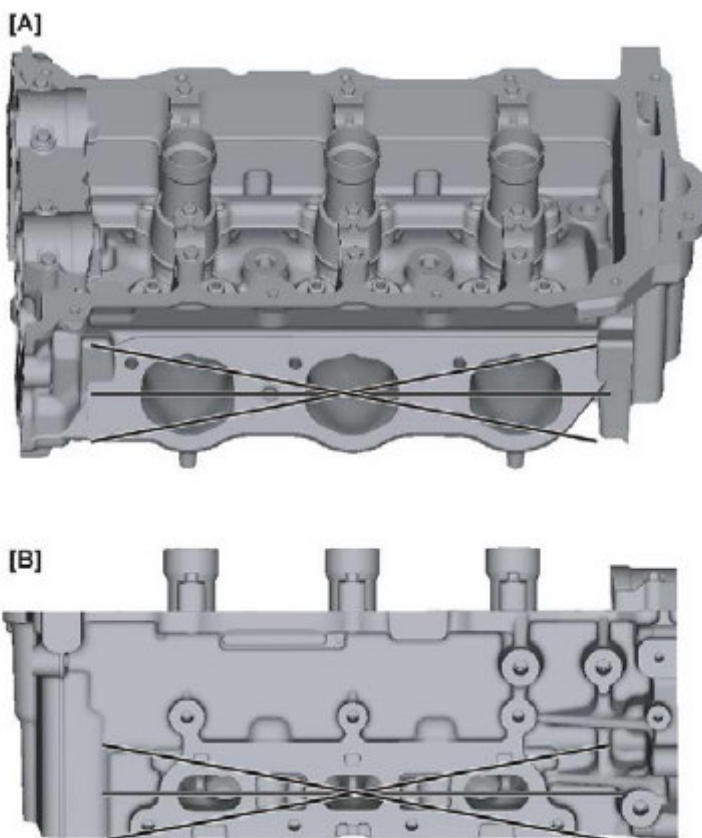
Identifying Distortion For Cylinder Head Surface On Piston Side
